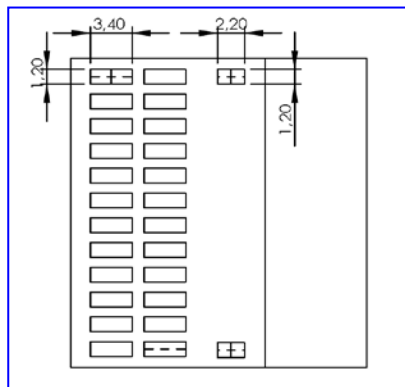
Solder mask for the DevCom 06 ZigBee Module
